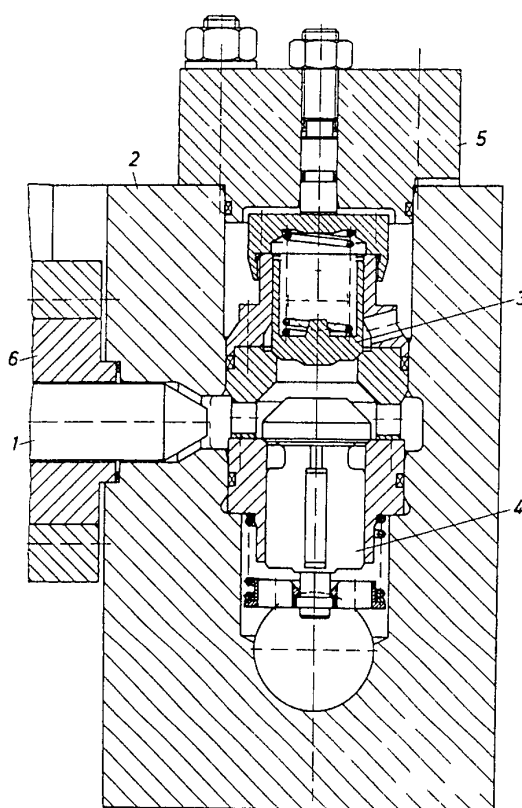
27 Typical valve and pump head design for a high pressure plunger pump (URACA)
